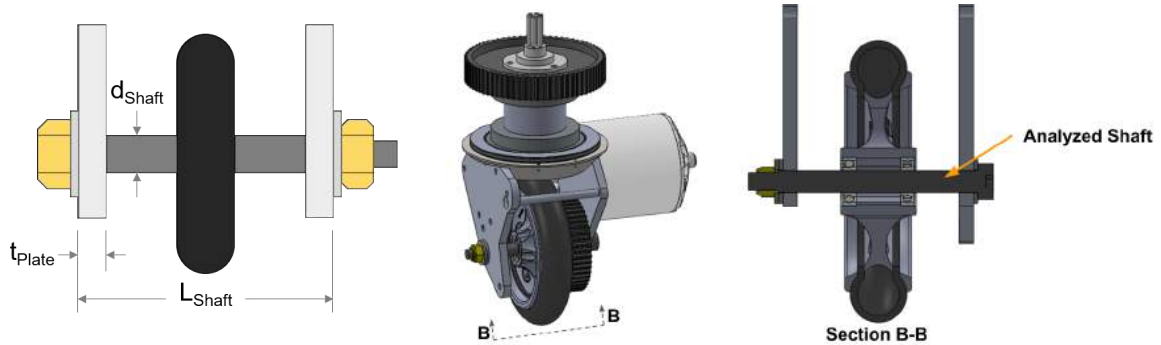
Geometric Diagram (Left), Assembly View (Center), Cross Sectional View (Right).
